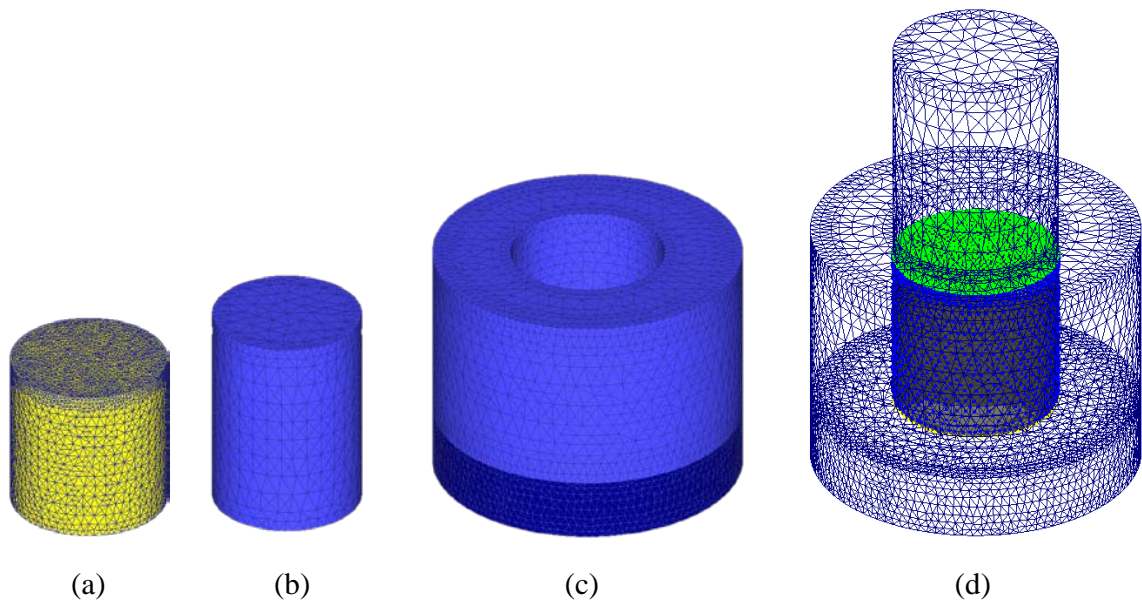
Sketch of the model: (a) compacted chips billet, (b) rotating die, (c) chamber and backing plate, (d) assembled model highlighting contact nodes.
